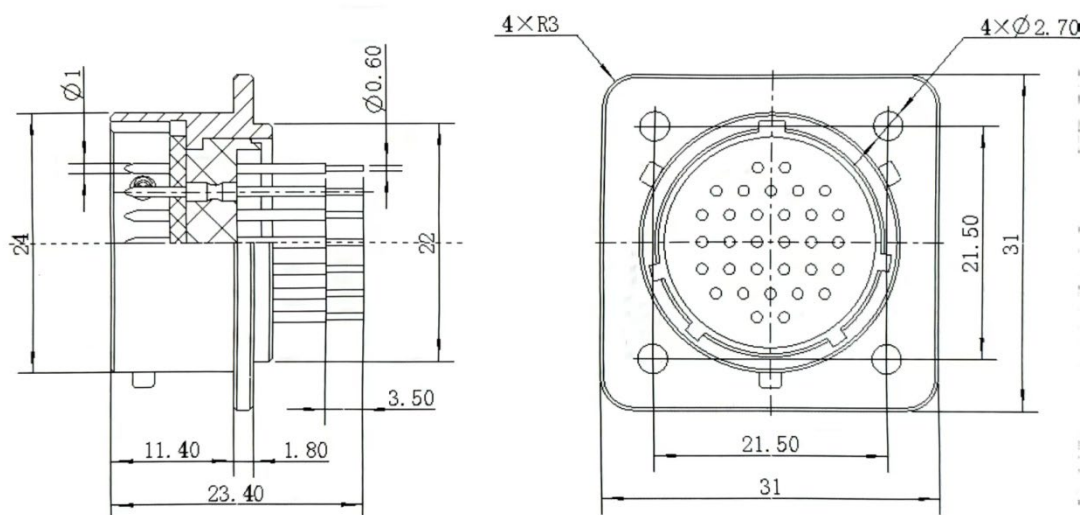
ZH127-2-32/22-BL1-1-B receptacle product dimensions drawing
